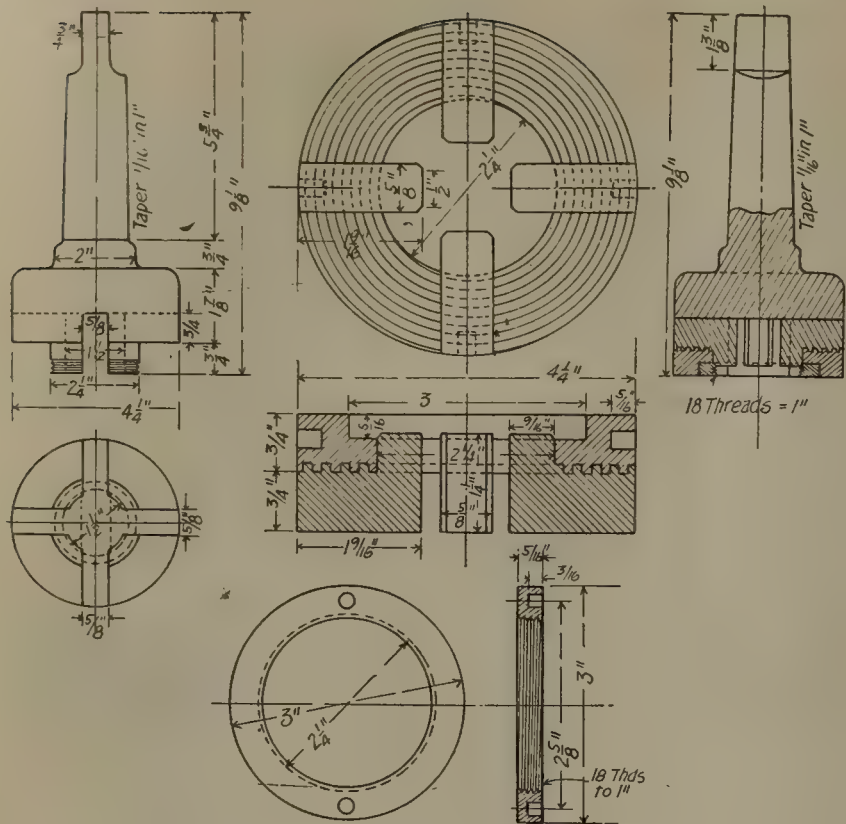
Internal Grinding Machine, G. R. & I. Ry.
